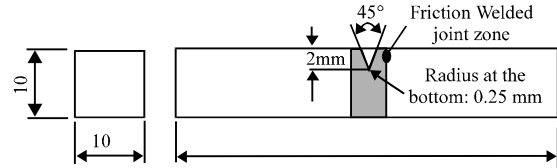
Shape and dimensions of Charpy impact strength test specimen (mm)
